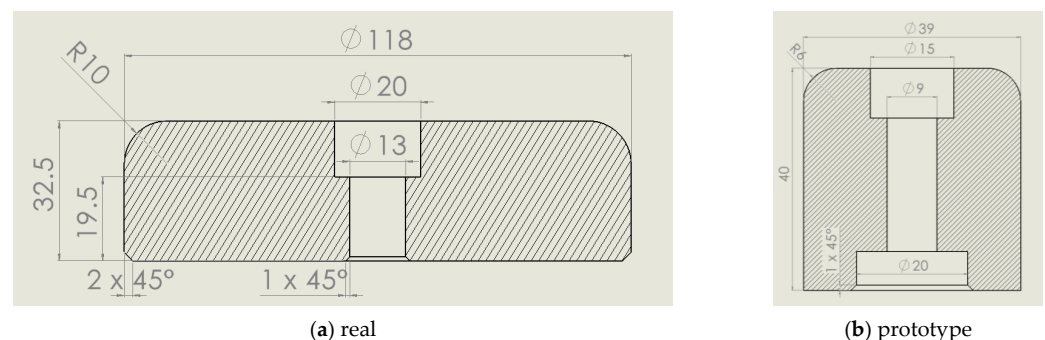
Drafting of (a) real RG and (b) prototype PG geometries designed for the experimental tests.
